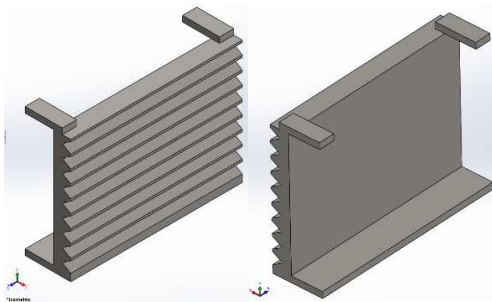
3D model of clamps (front and back isometric view)-metric thread
